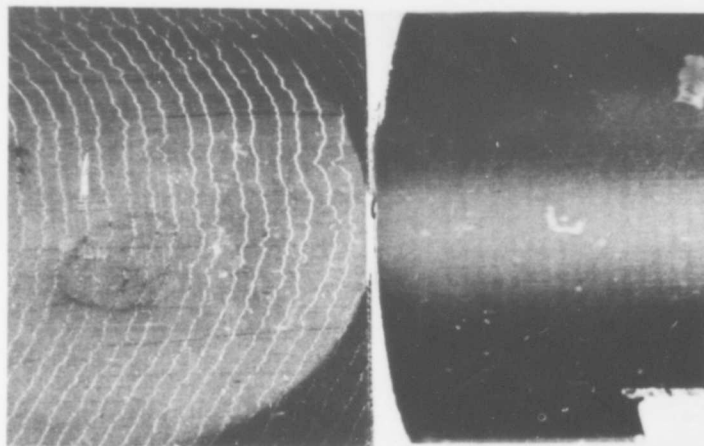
SEVERELY SCRATCHED OR SCORED I.D.; (AS SHOWN IN FIG. 28) CONDITION COMPLETELY REMOVED BY CHEM-MILLING 0.002 IN. OF SURFACE
